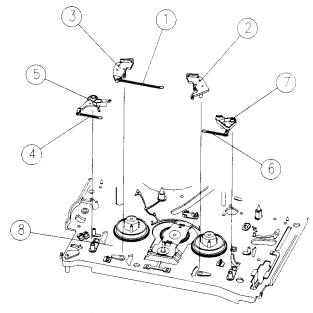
S/T MAIN & SUB BRAKES REMOVAL
